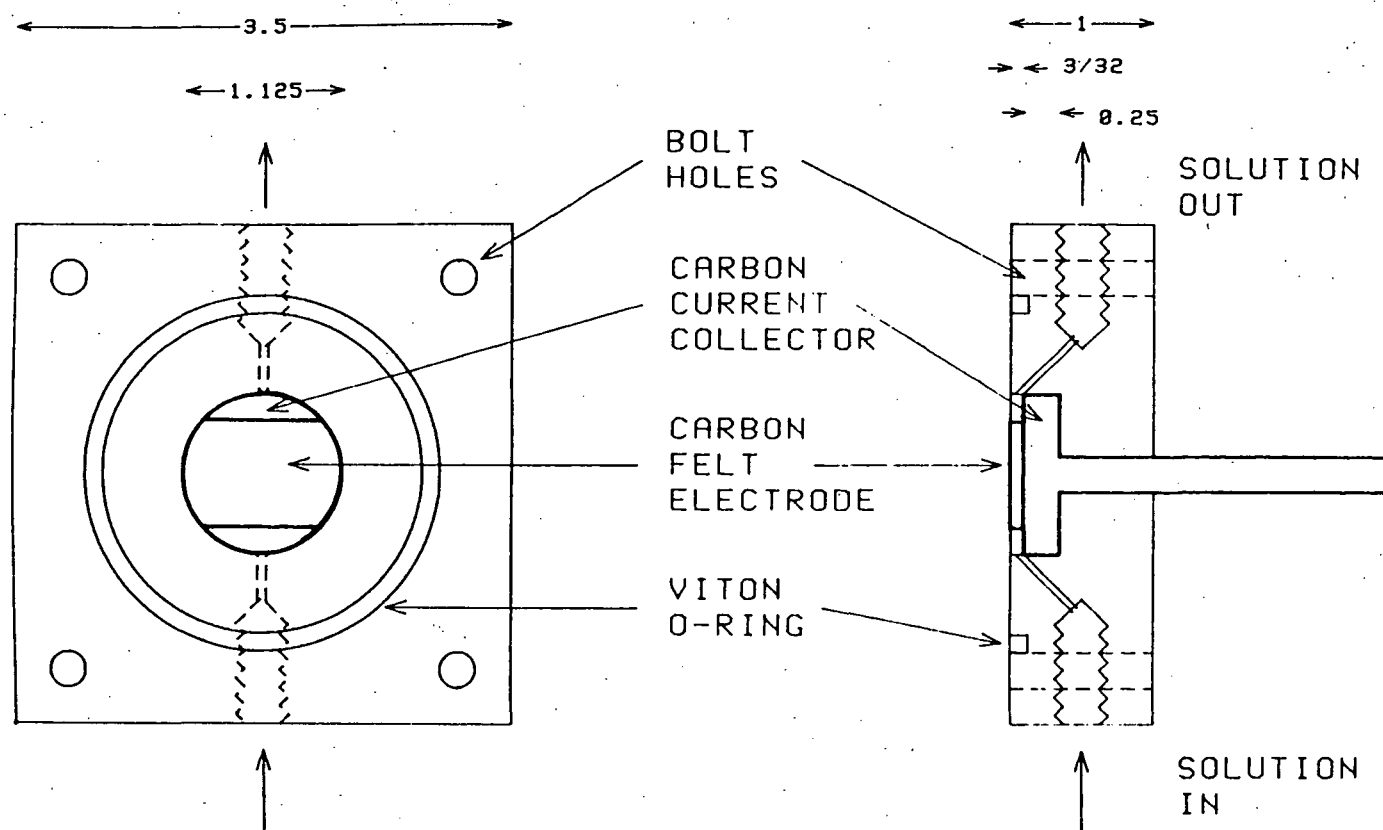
Diagram of bromine half cell. The dimensions of drawing are inches, and the drawing is to 75% of scale.
